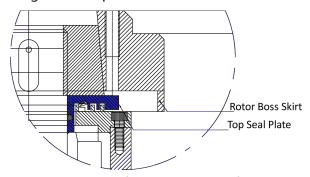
Detail view of the rotor boss skirt fitting on top of the REMco oil or grease bearing cartridge.
